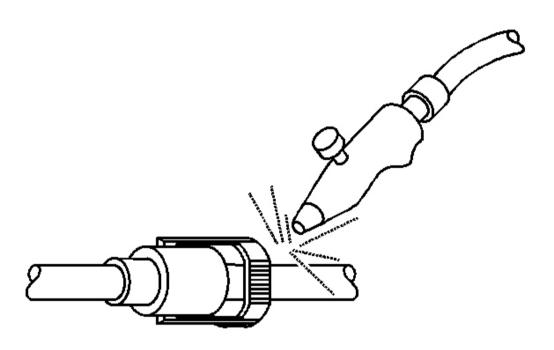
View Of Quick Connect Fitting Service (Plastic Collar) Courtesy of GENERAL MOTORS CORP.
